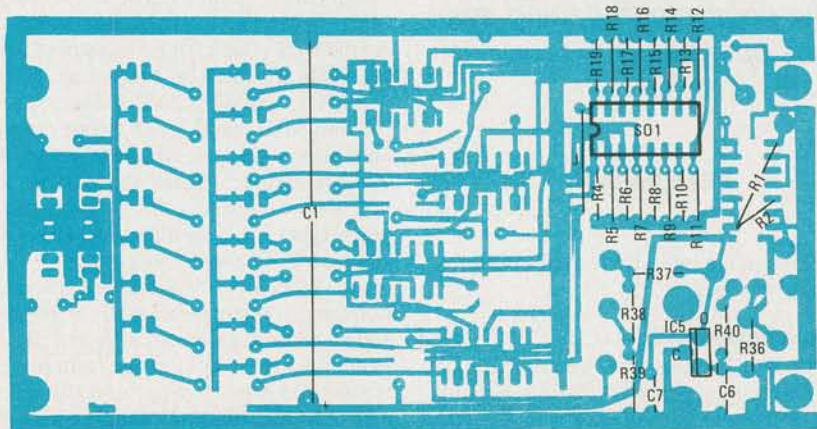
PARTS PLACEMENT on "foil-side" of display board. Resistor R2 (at right) is soldered to pads on opposite sides of board.
